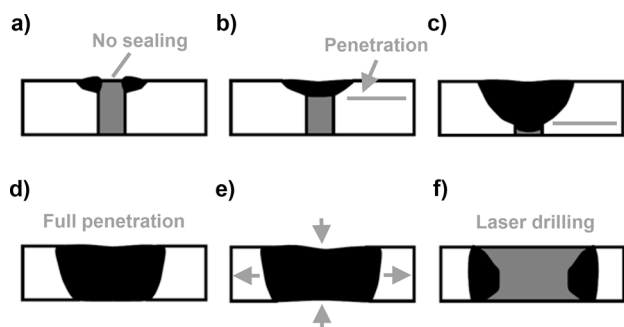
Illustration of weld cross-section with increasing laser energy from (a) to (e). (a) No sealing due to insufficient melted volume; (b) onset of sealing; (c) increased weld penetration; (d) full penetration; (e) weld pool growth with full penetration; (f) laser ablation and drilling (not to scale).
